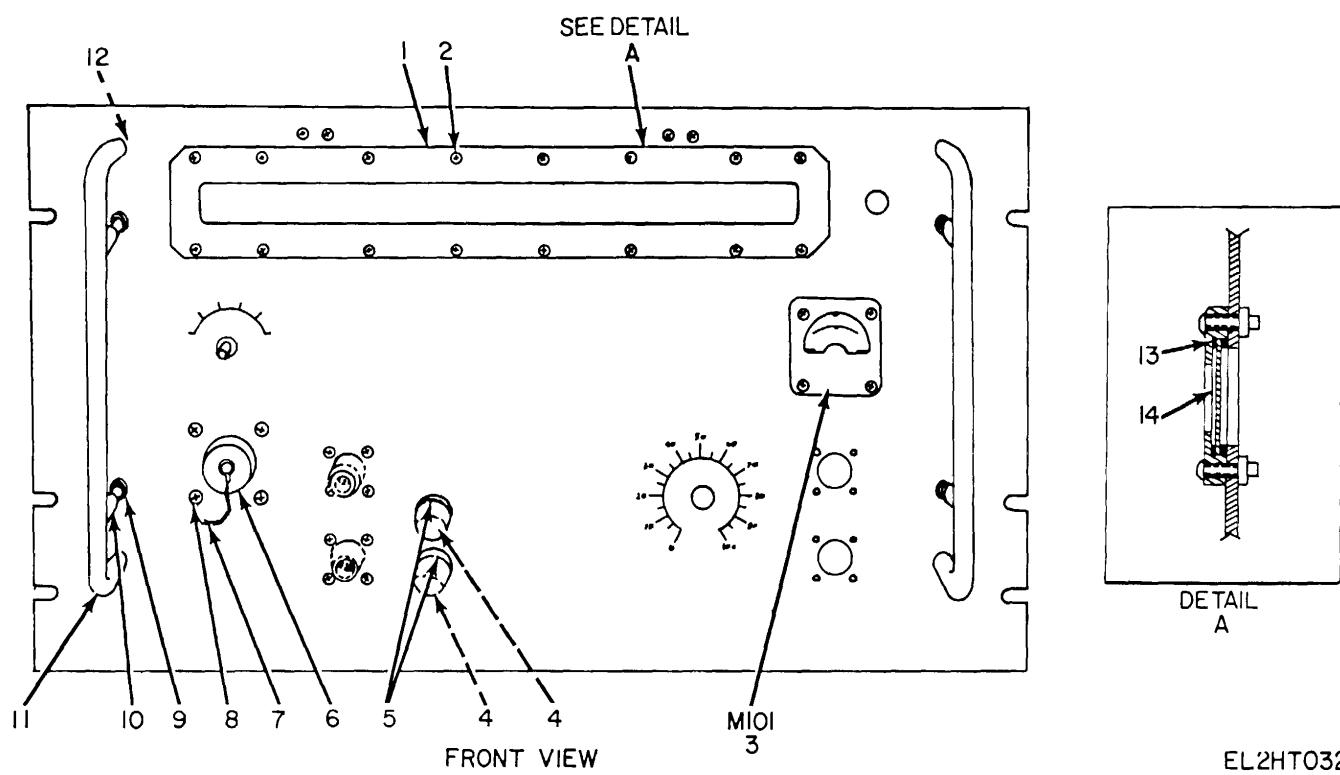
Panel Assembly, Lower Front (Sheet 1 of 2)
